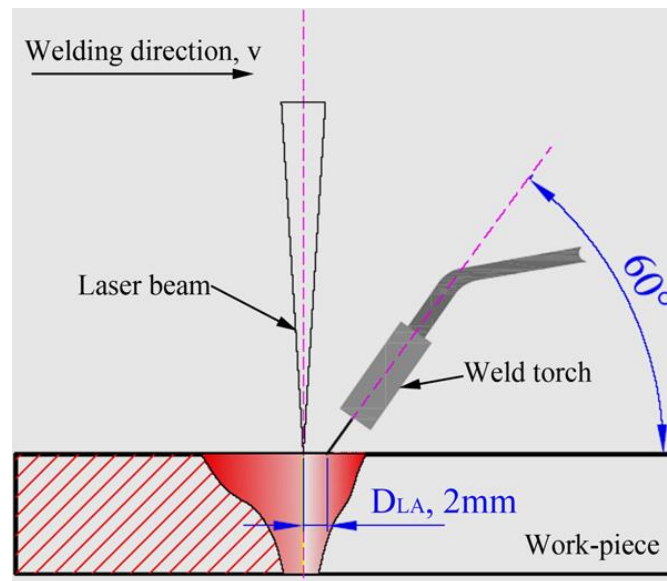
Ideal spacing of laser beam and arc to achieve synergy of both processes when welding 7mm thick mild steel plate [34].
